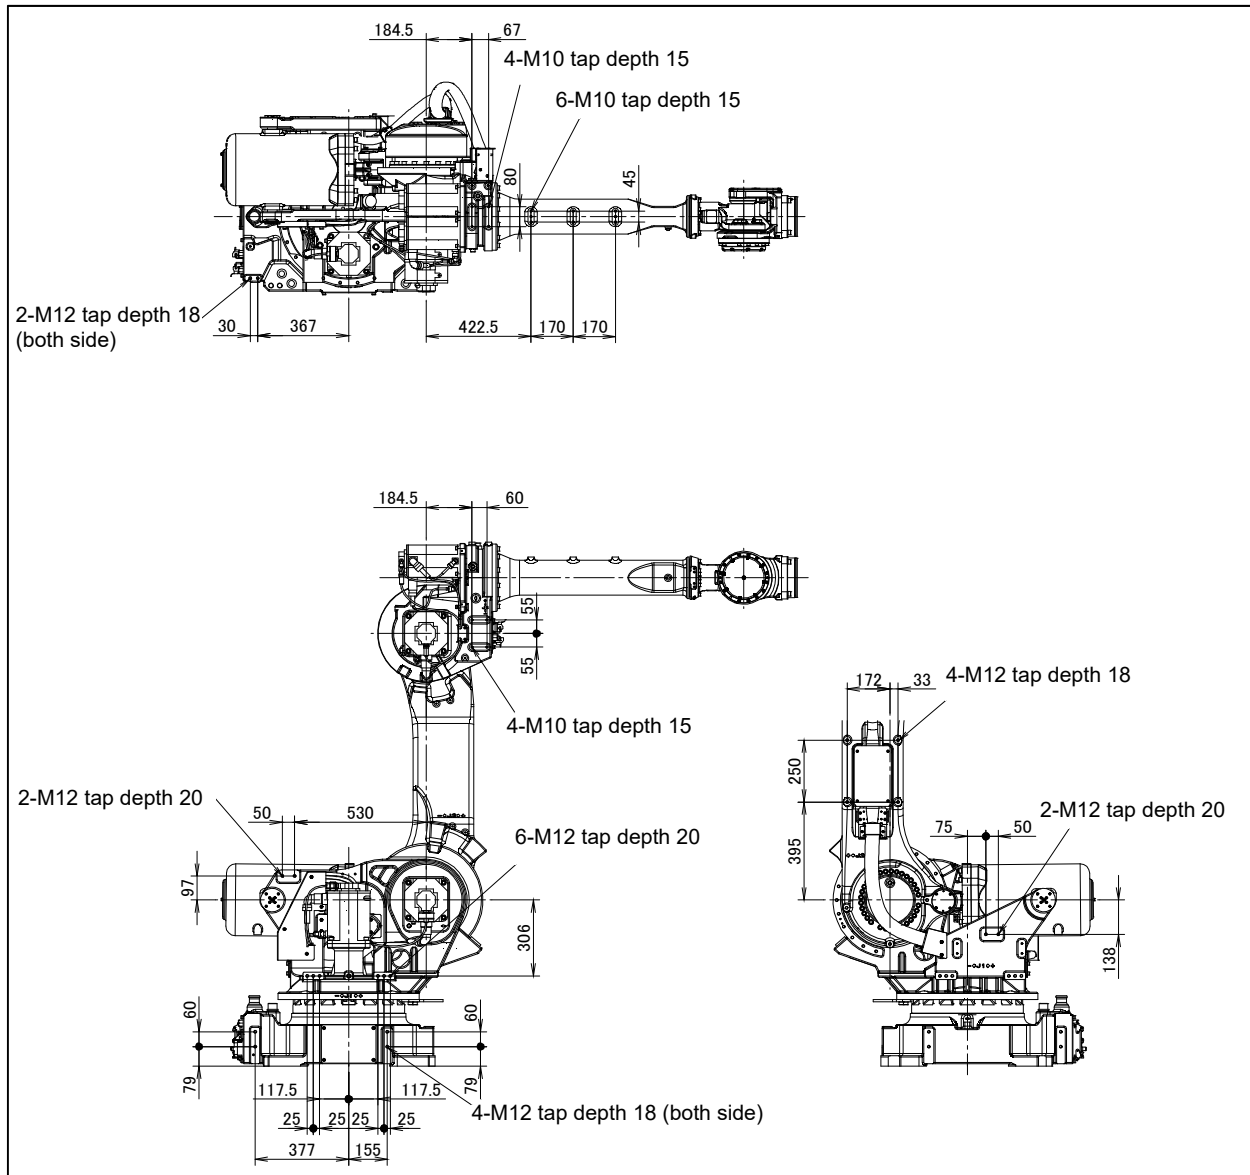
(j) Equipment mounting faces (R-2000iB/100H)
